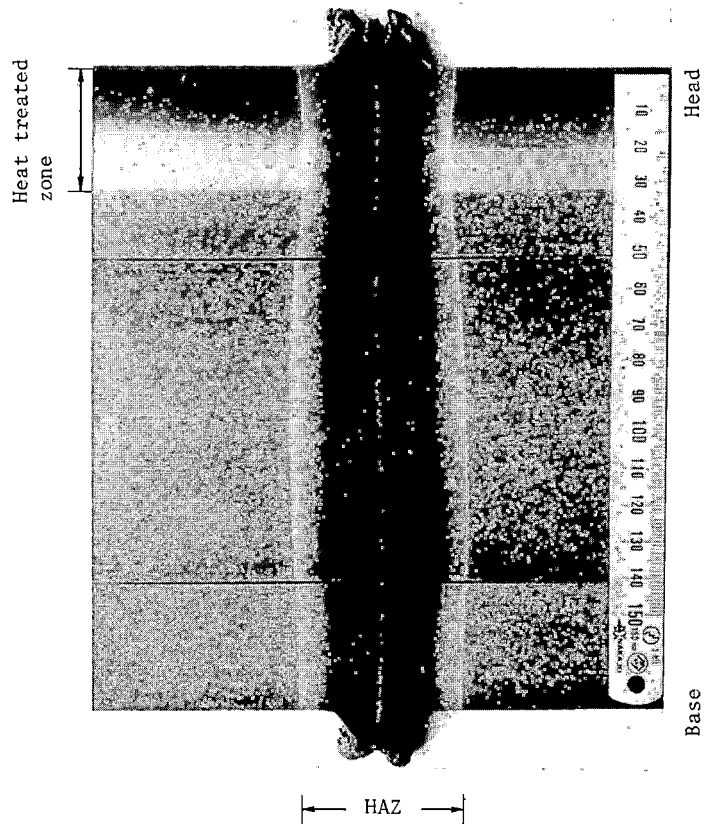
Macrostructure of longitudinal-vertical section of NS II rail welded by flash butt welding
